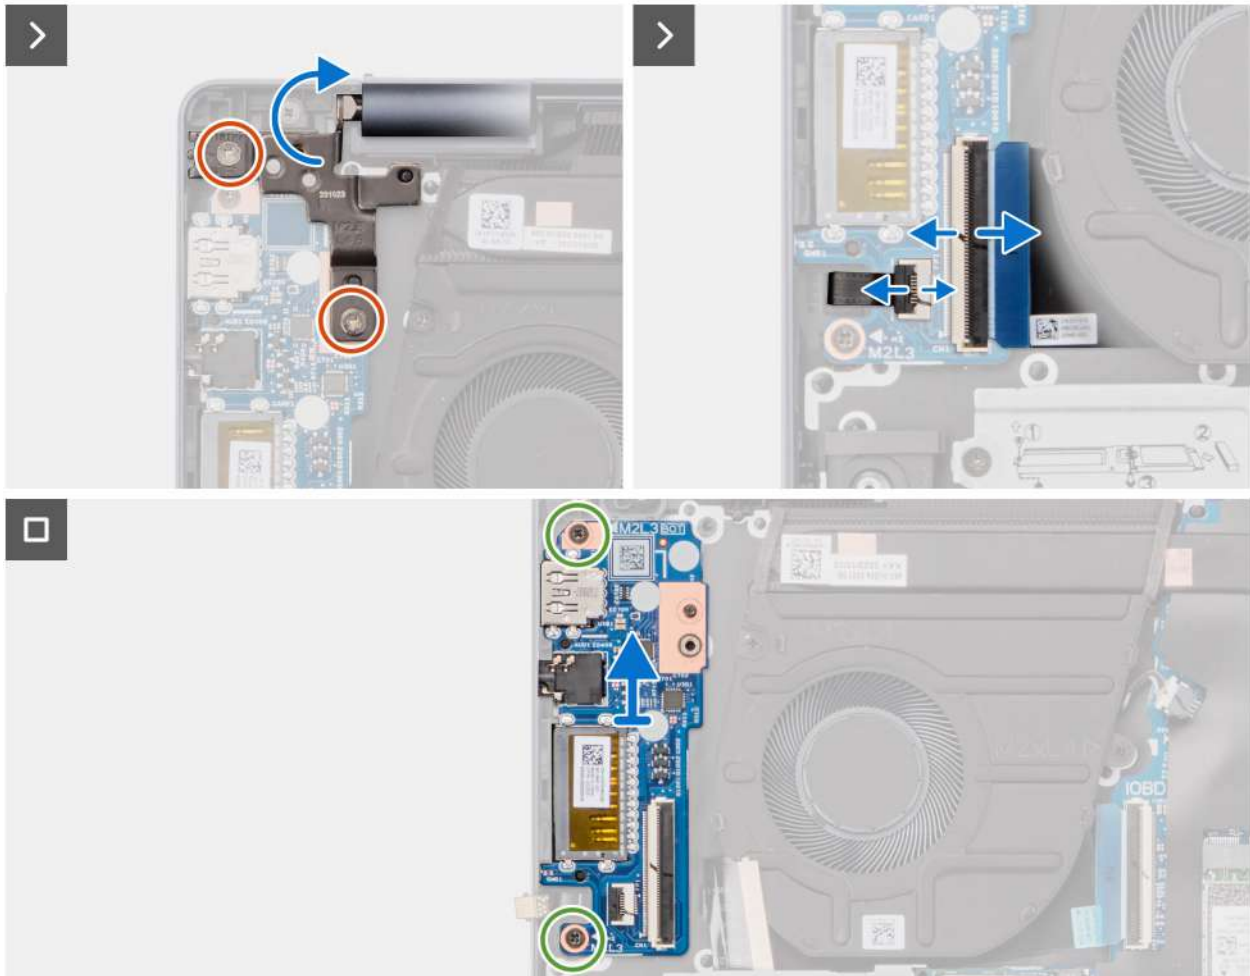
Removing the I/O board (for computers shipped with an aluminum chassis)
